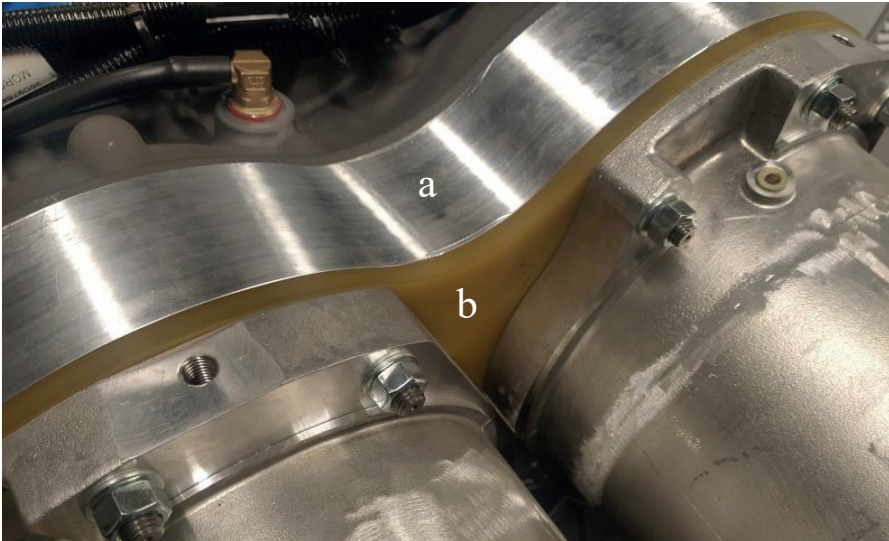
Dielectric material installed in between the housing of the electrical machines and the mechanical transmission housing (b) and additional flange (a).
